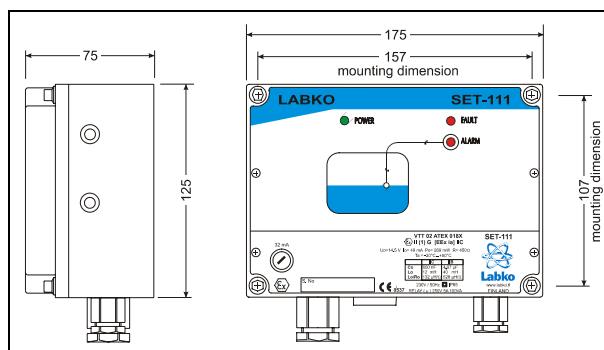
Dimensional drawing of the SET-111 control unit's enclosure.
